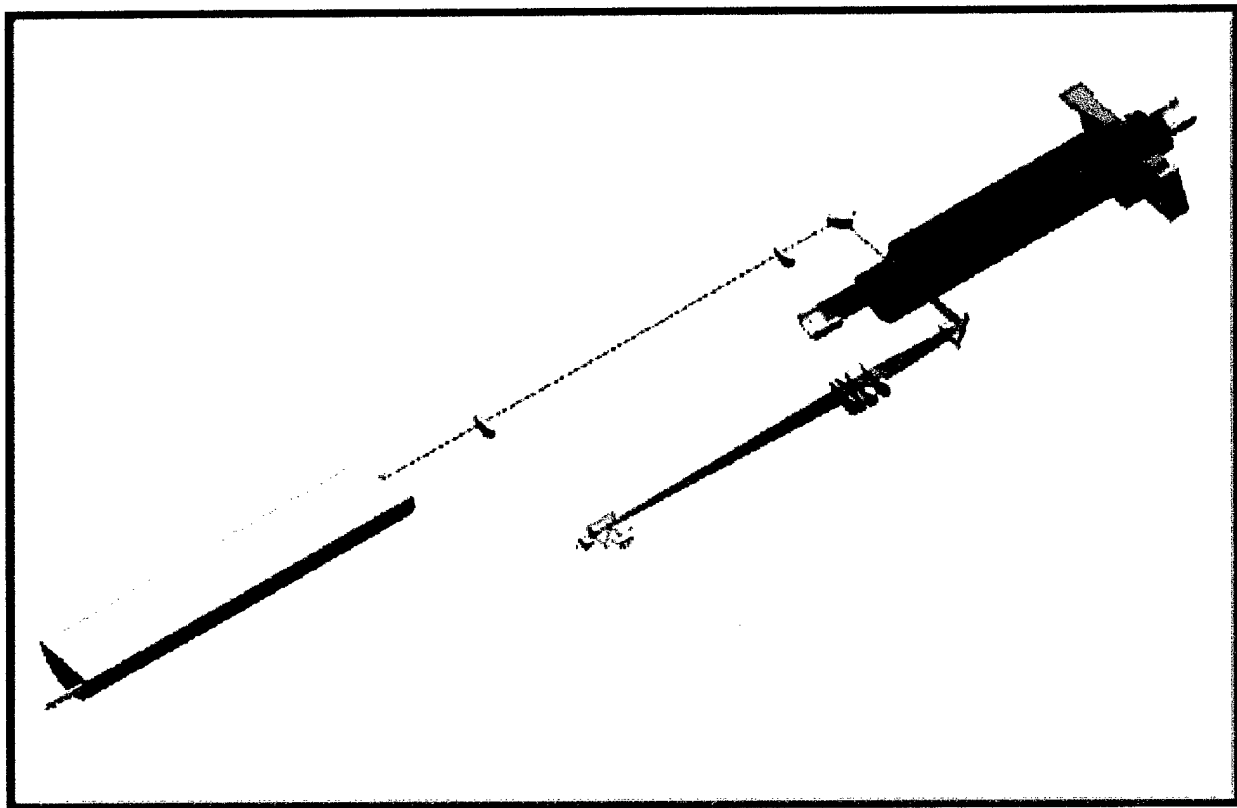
Solidworks™ CAD drawing of the inlet calibration device installed in an FSSP.
